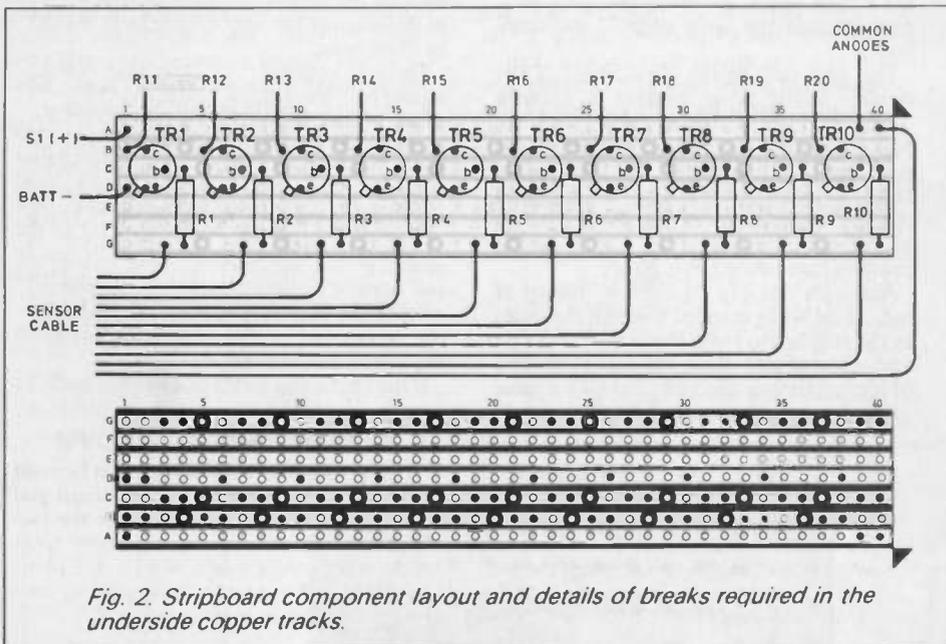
Stripboard component layout and details of breaks required in the underside copper tracks.
